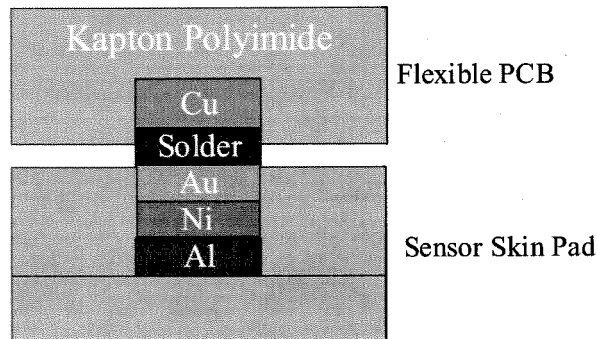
Solder bonding between flexible skin and flexible PCB.
